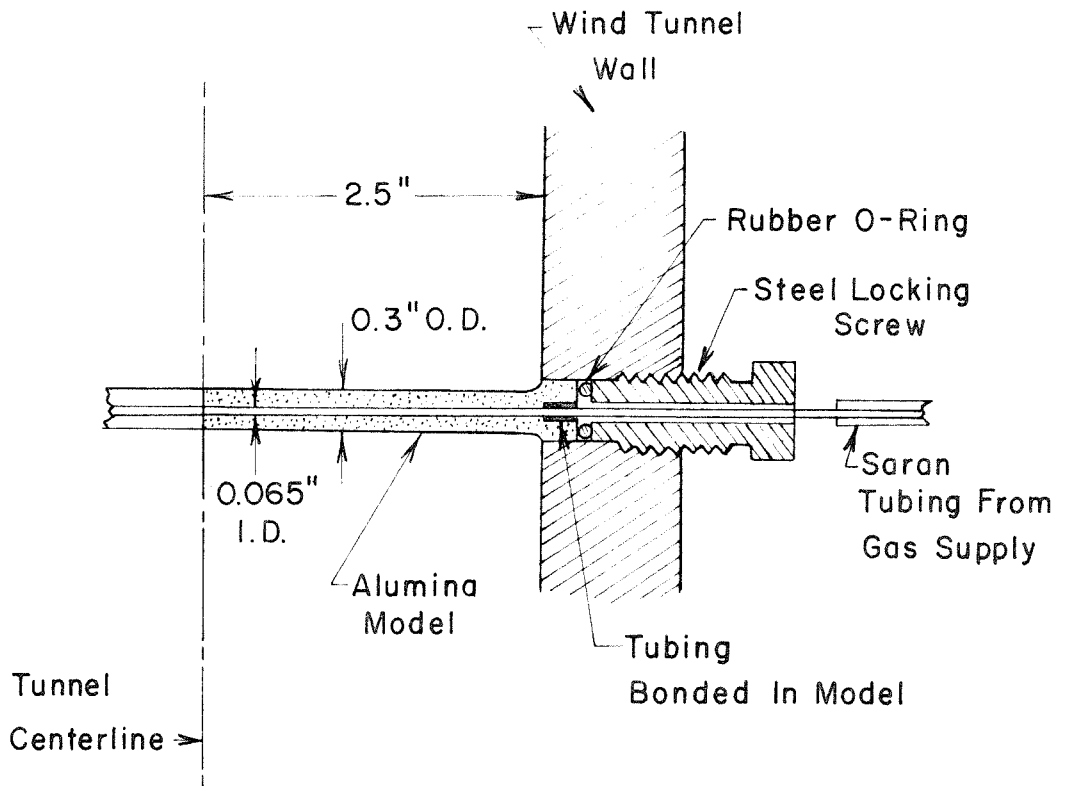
CROSS-SECTION VIEW OF MODEL INSTALLATION
